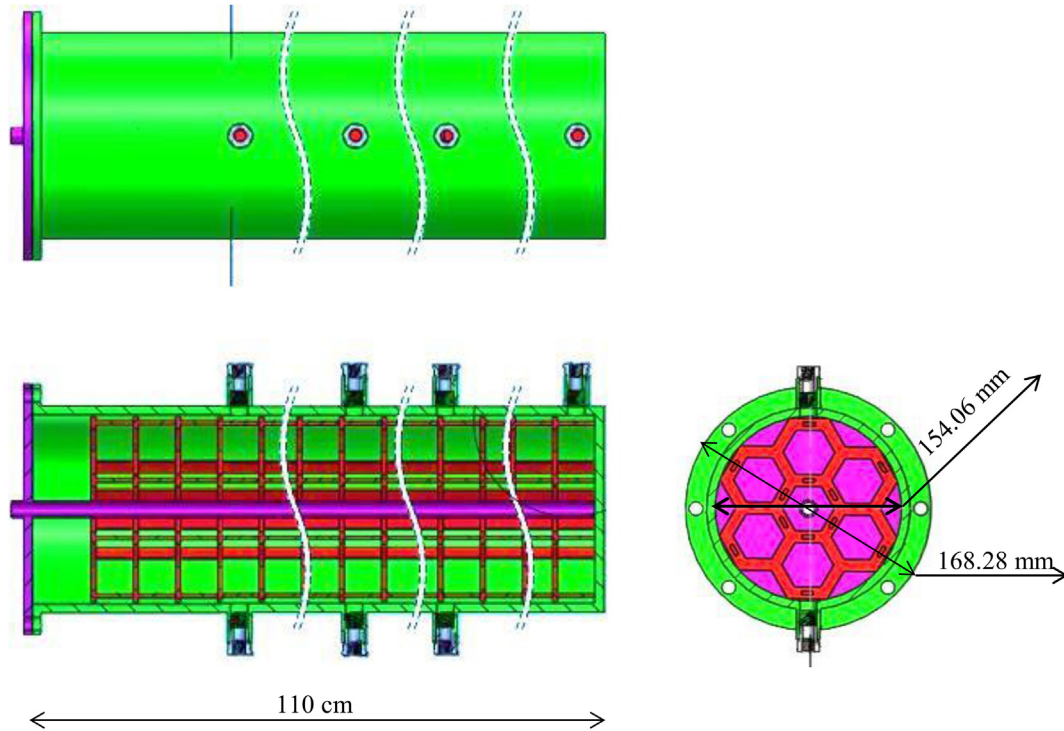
Diagram showing the assembled and sectioned view of the reactor.
